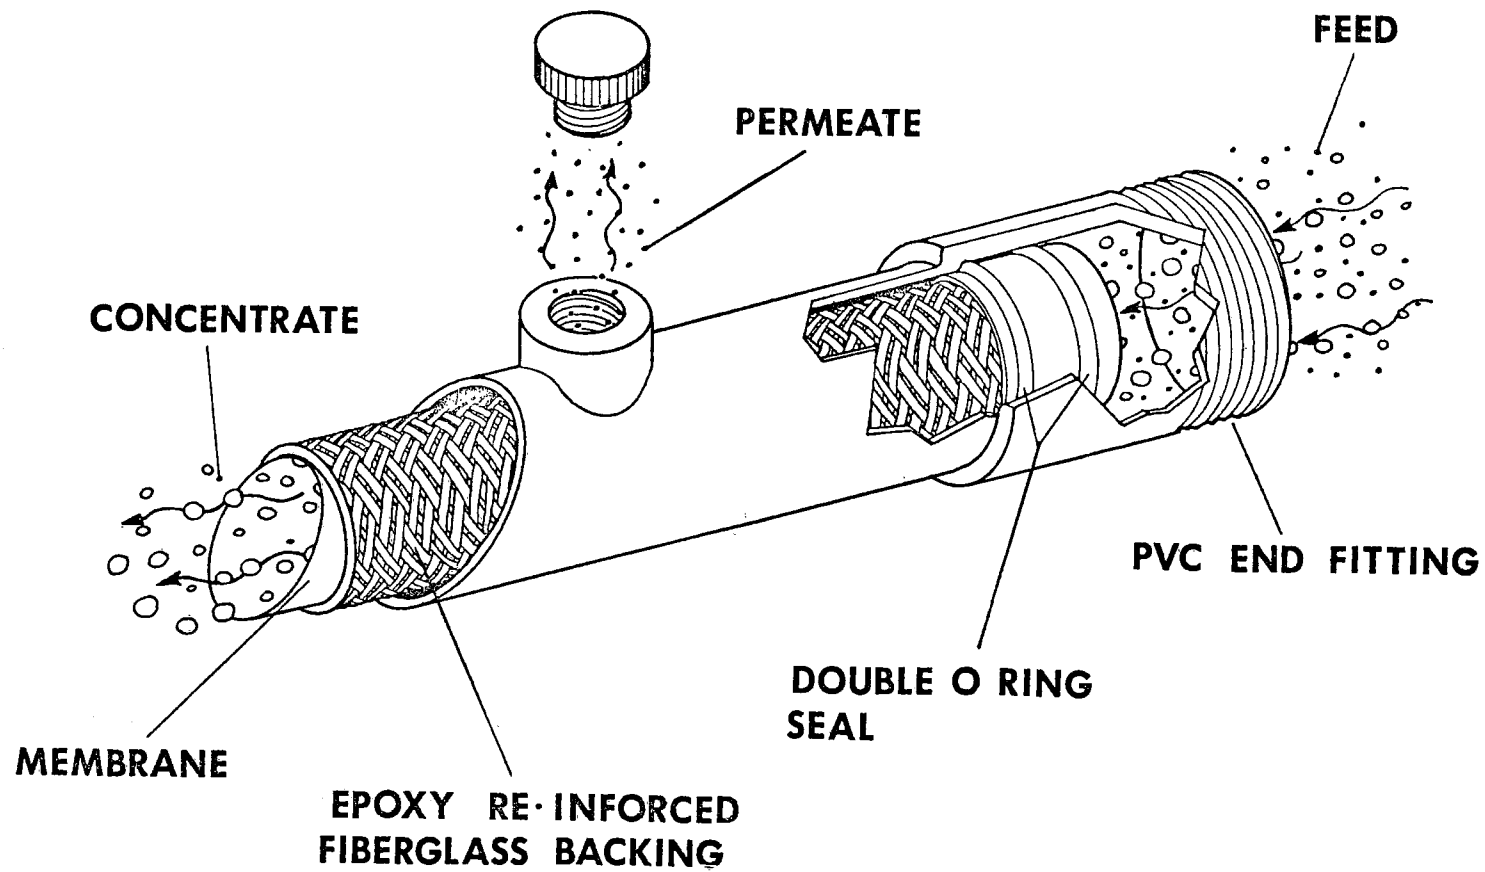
Cut-away view of tubular ultrafiltration assembly.
